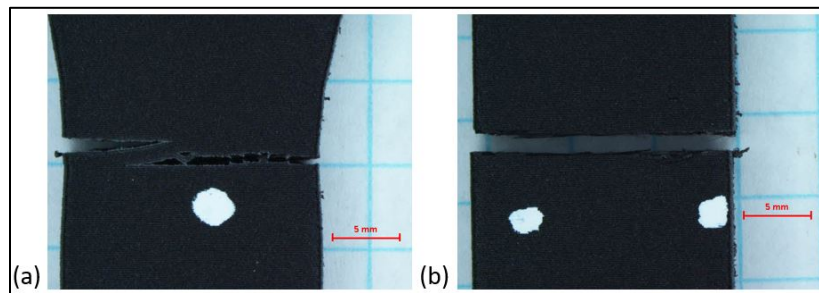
Fractured tensile specimens (a) 4-1, and (b) 4-2 printed vertically on print bed with Onyx® skin and 100% infill of unidirectional carbon filament oriented perpendicular to direction of tensile load.
